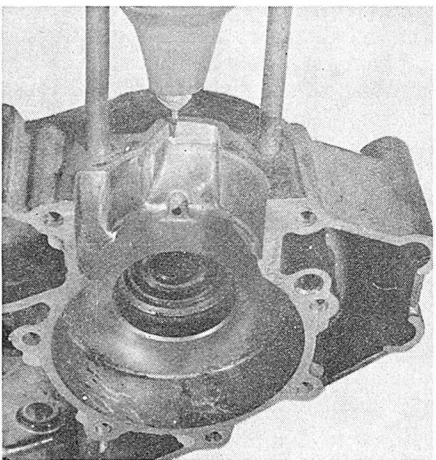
A—All bearings should be removed when correcting misalignment of passages. Make certain that all parts are completely cleaned before assembling.
